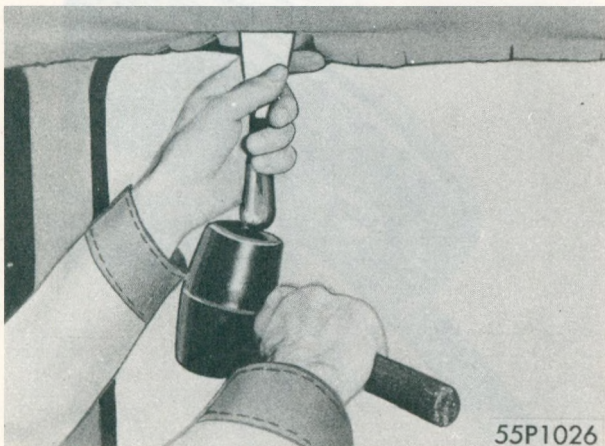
Tucking Headlining between Roof Rail and Retainer
